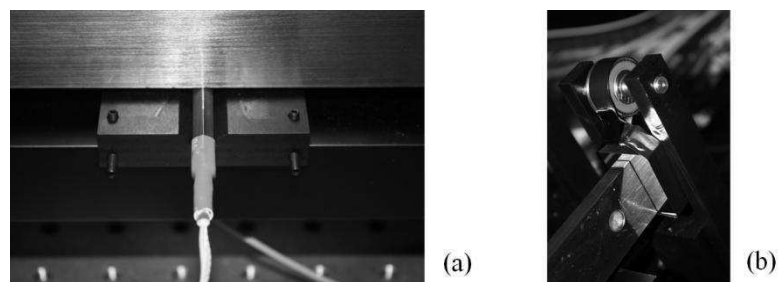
Gauge block lying on the hexagonal support with thermistor inside (a). Reference plate adhered to the gauge block is hanging on a weight-compensating counterweight (b).
